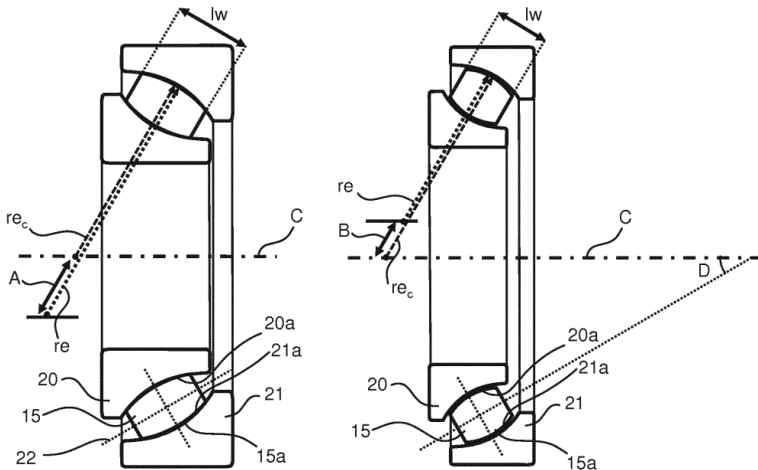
Roller designs of an angular toroidal roller bearing [KKL16]
